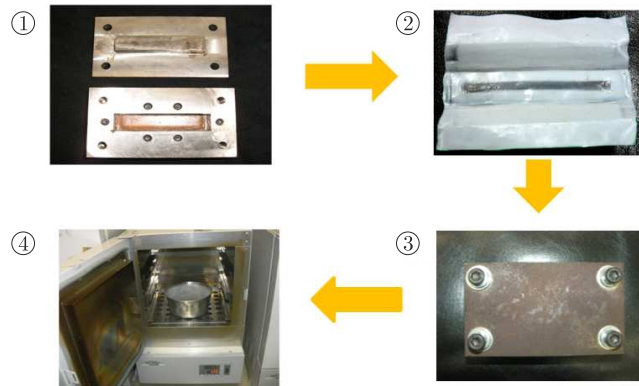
Photograph of the fabricating the SMC belt: ① upper and lower molds, ② setting the SMC belt on the Teflon sheet, ③ fastening the SMC belt, ④ putting the SMC belt into the furnace for heat treatment.
